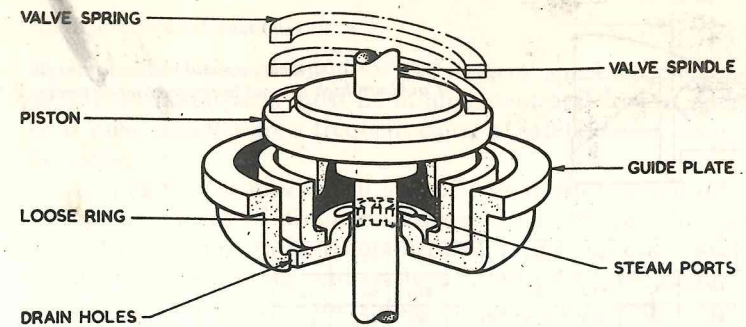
Arrangement of uplift piston Cockburn improved high-lift safety valve
